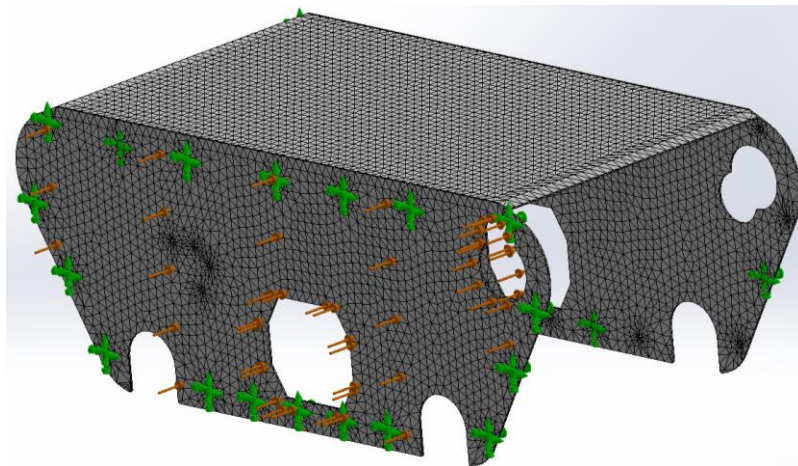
Assembly mesh, fixtures (green) and force (orange)
